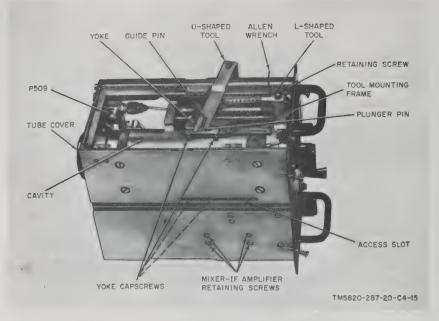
AM-3203A/TRC-24, tools installed for alignment.
